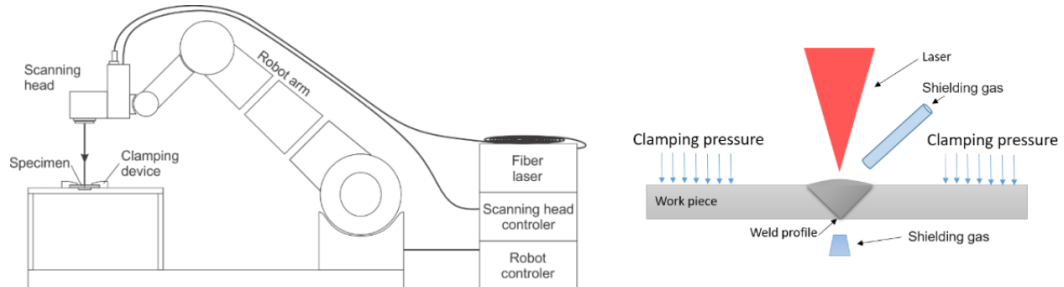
Schematic representation of the setup based on laser remote welding system.
